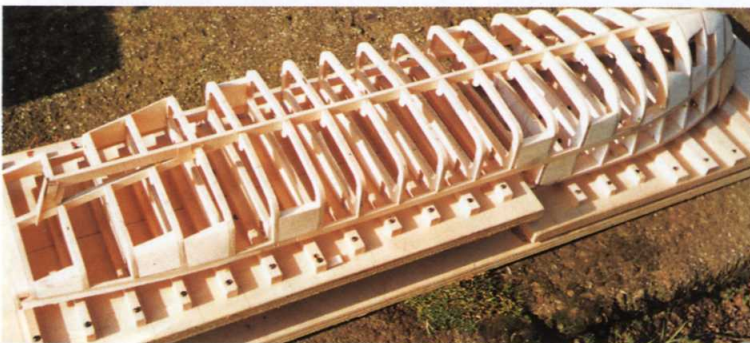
The structure of a Plank on Frame model before planking. Note the two tier base board. (Dave Watkin photo).
